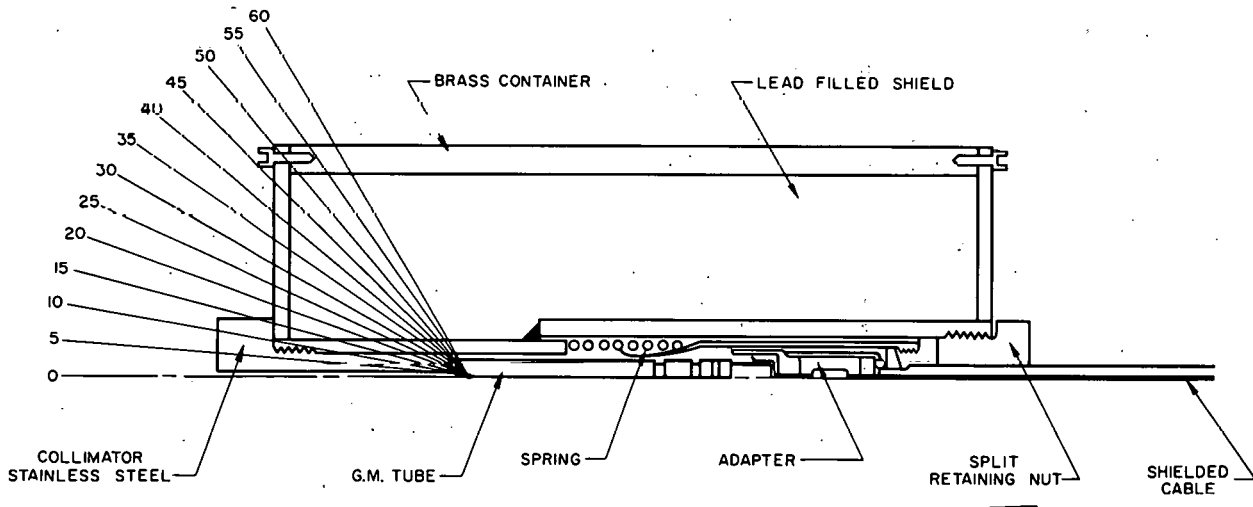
Cross-Sectional View of Collimated G. M. Tube and Shield
